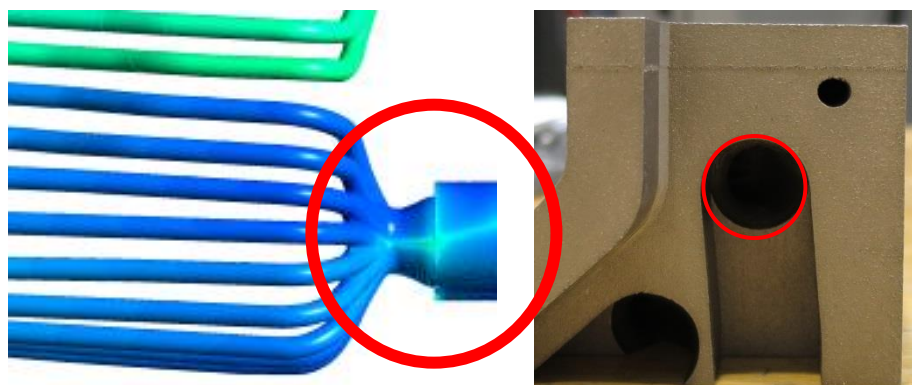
Inlet of the additively manufactured cooling system – CAD model (left) and manufactured component (right)
